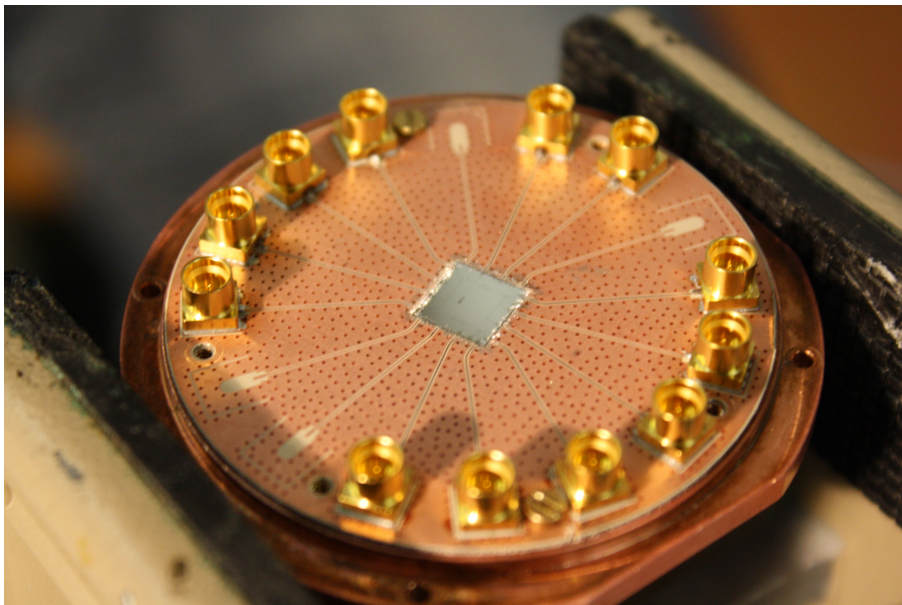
The microchip is glued on a PCB and some SMP connectors are soldered on the PCB.
